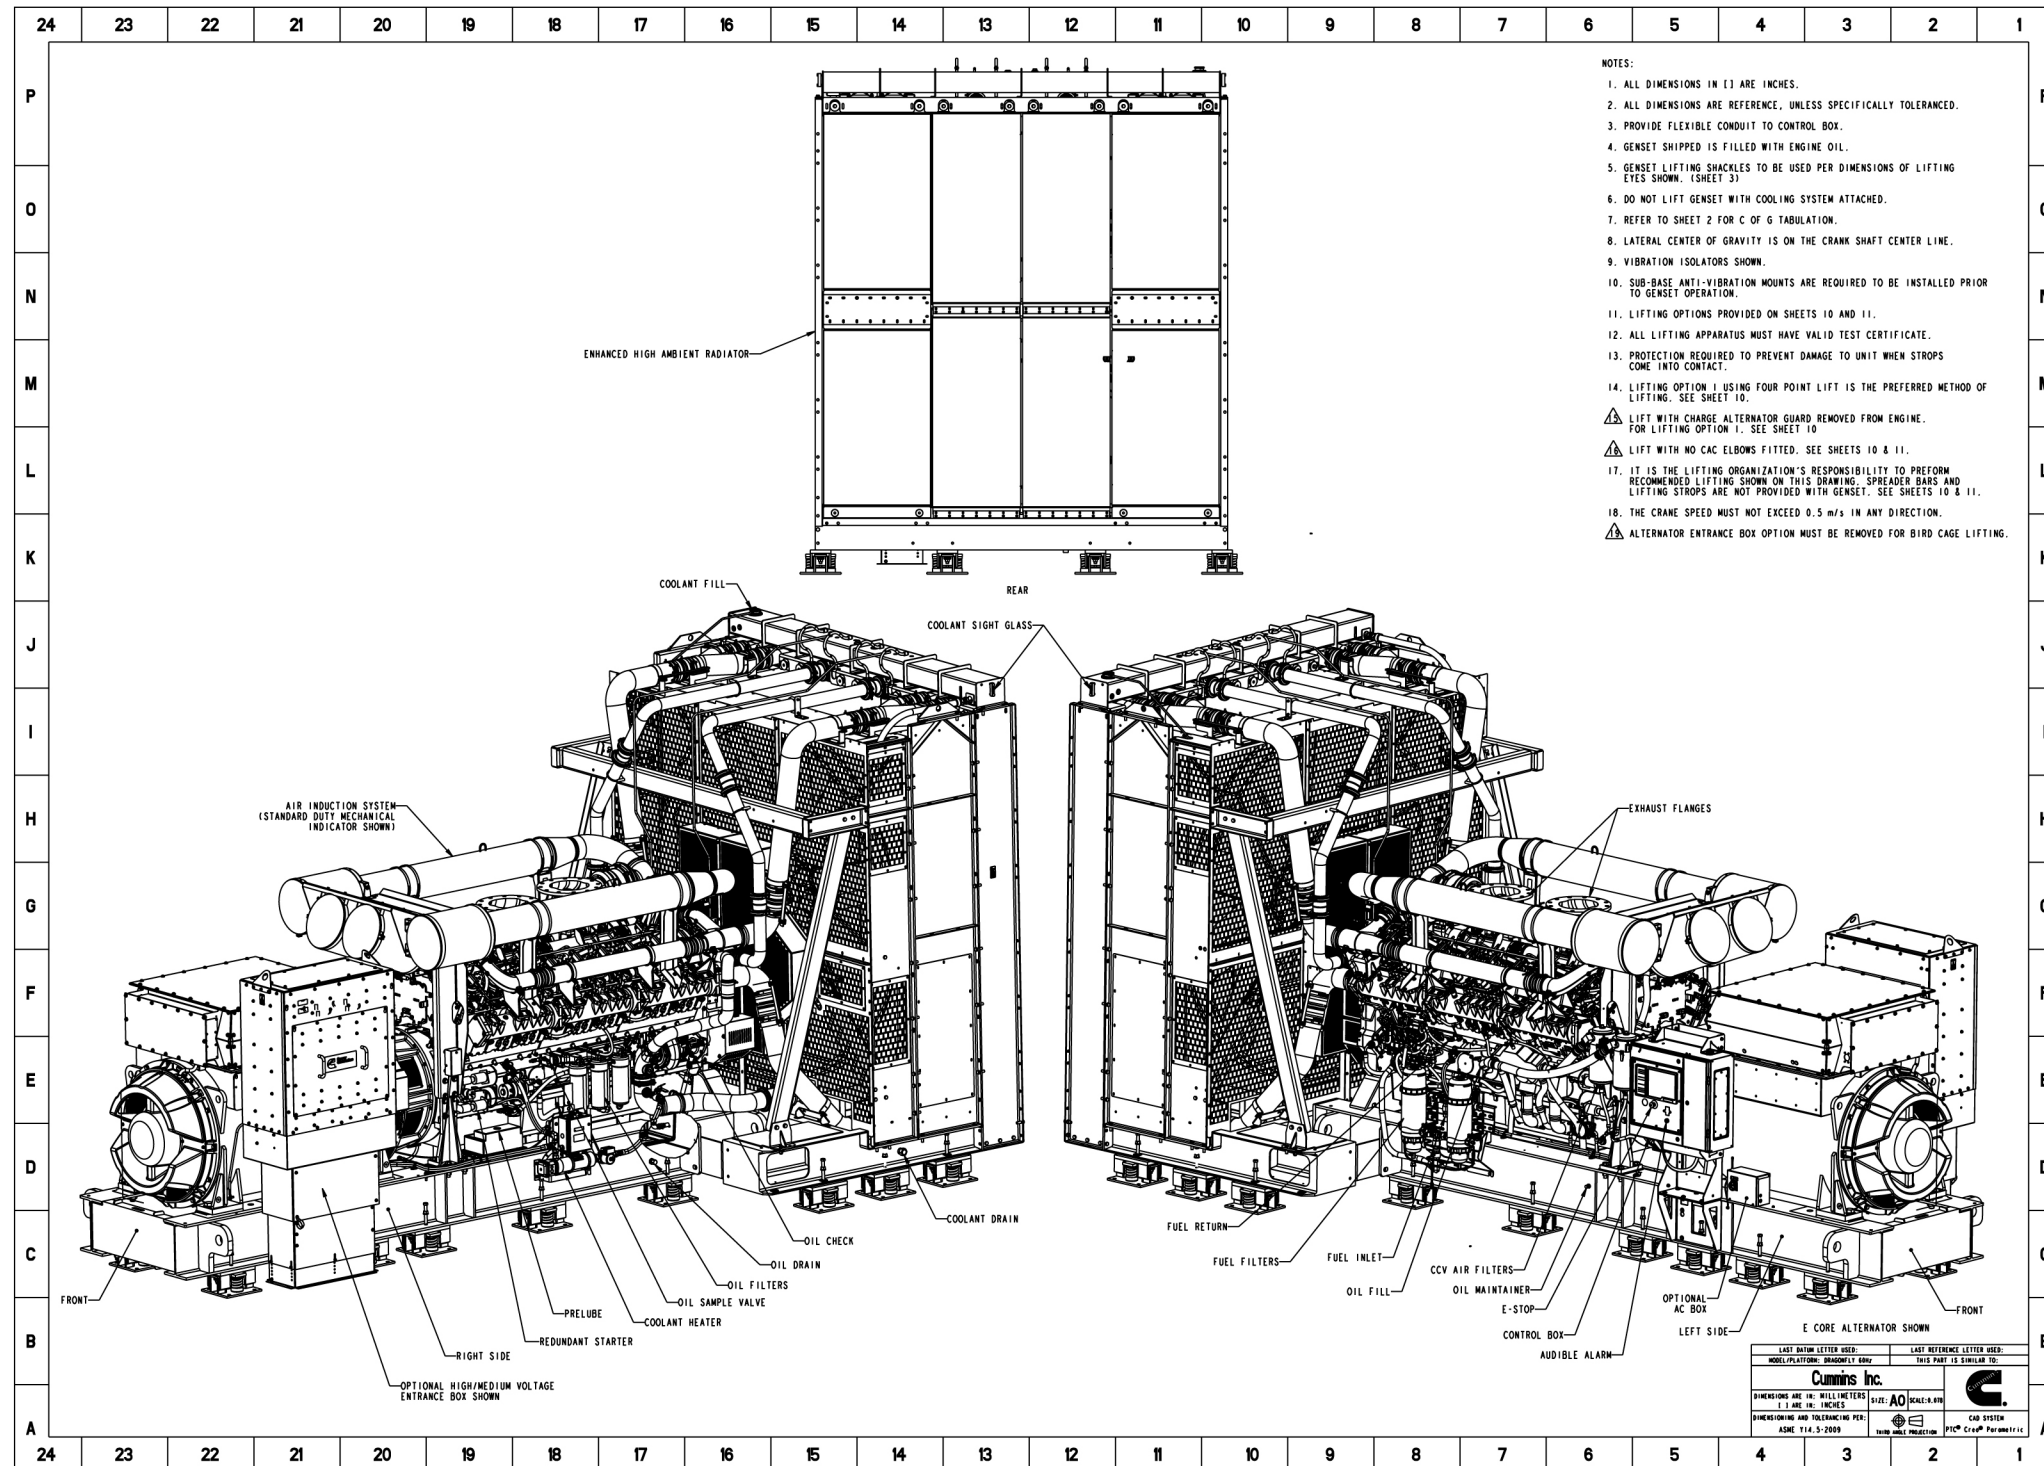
OUTLINE DRAWING (SHEET 1 OF 8)
